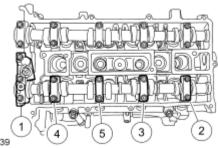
Locating Camshaft Lobe Courtesy of FORD MOTOR CO.
